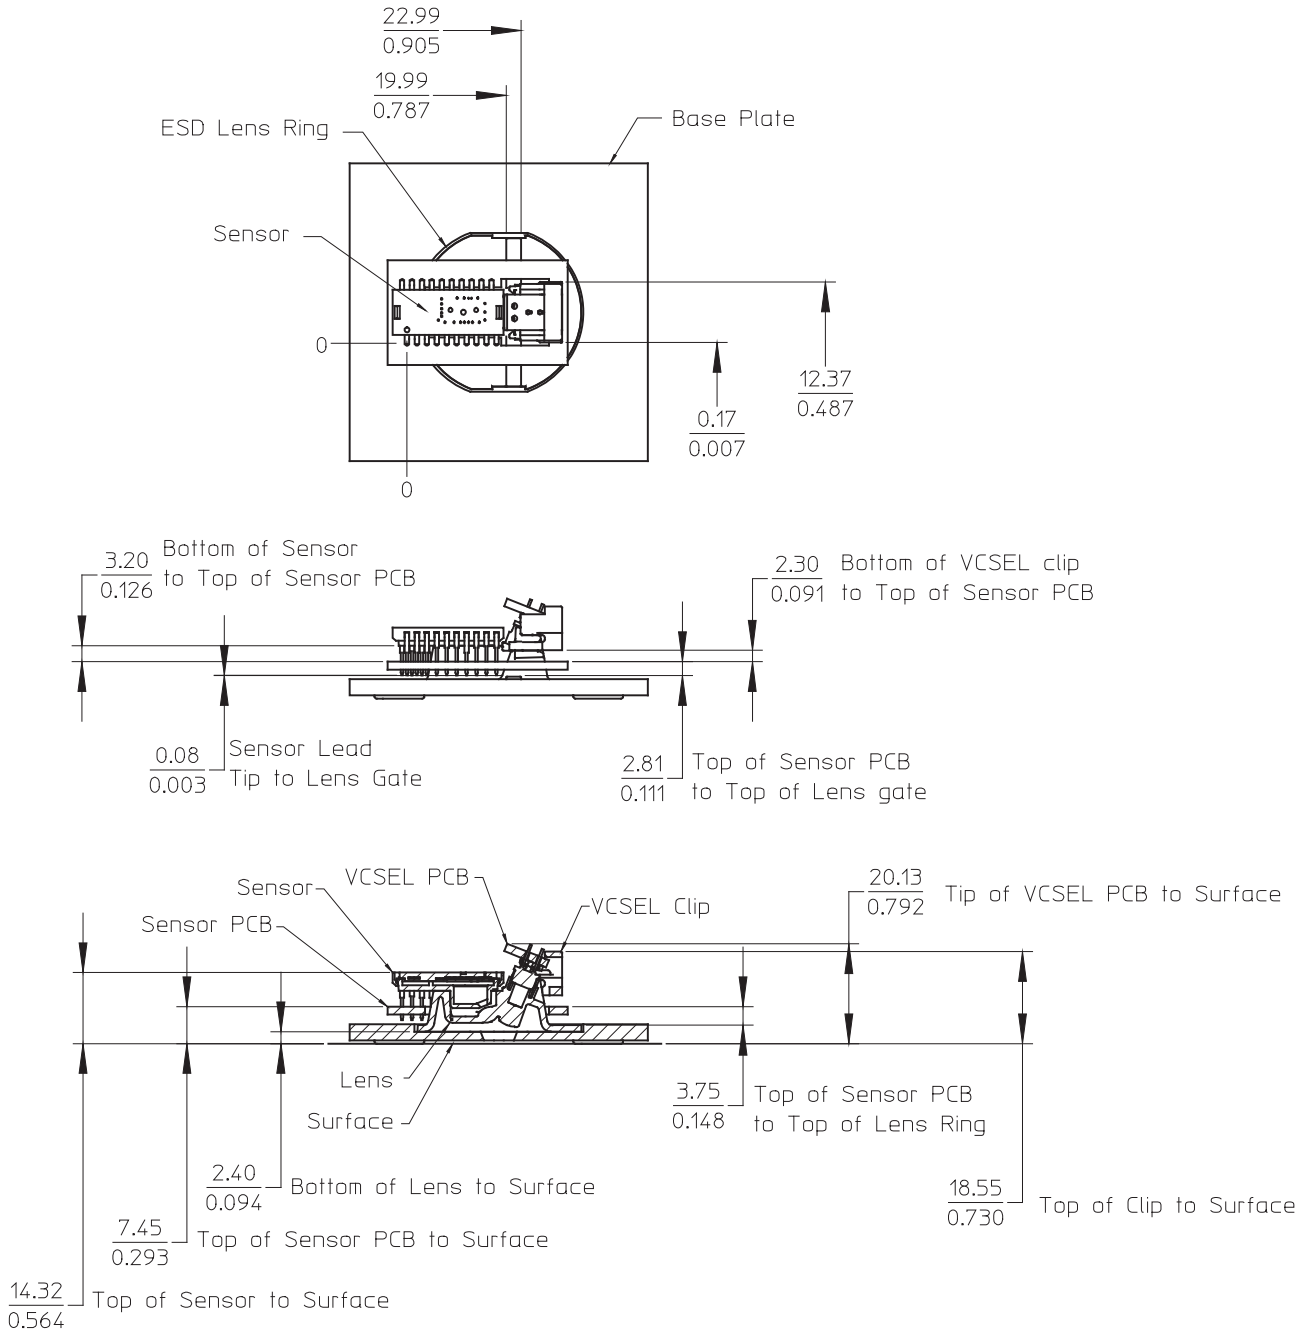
Assembly drawing of ADNS-6090 (top, front and cross-sectional view)
